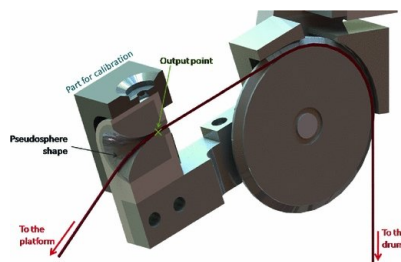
Cut CAD view of the eyelet in the pulley assembly [2]
